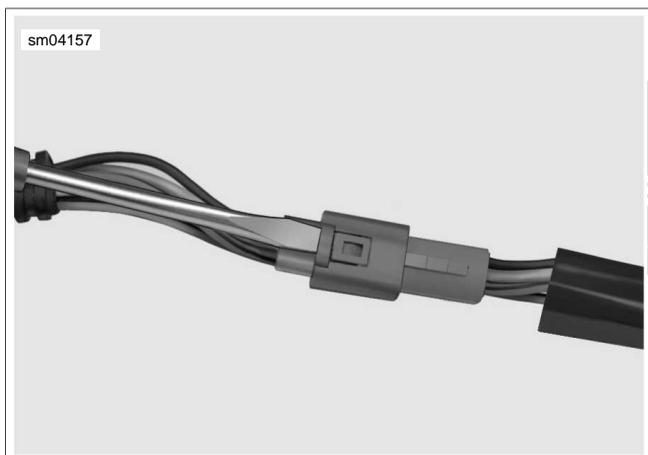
Gently Insert Screwdriver to Disconnect Twist Grip Sensor Connector
